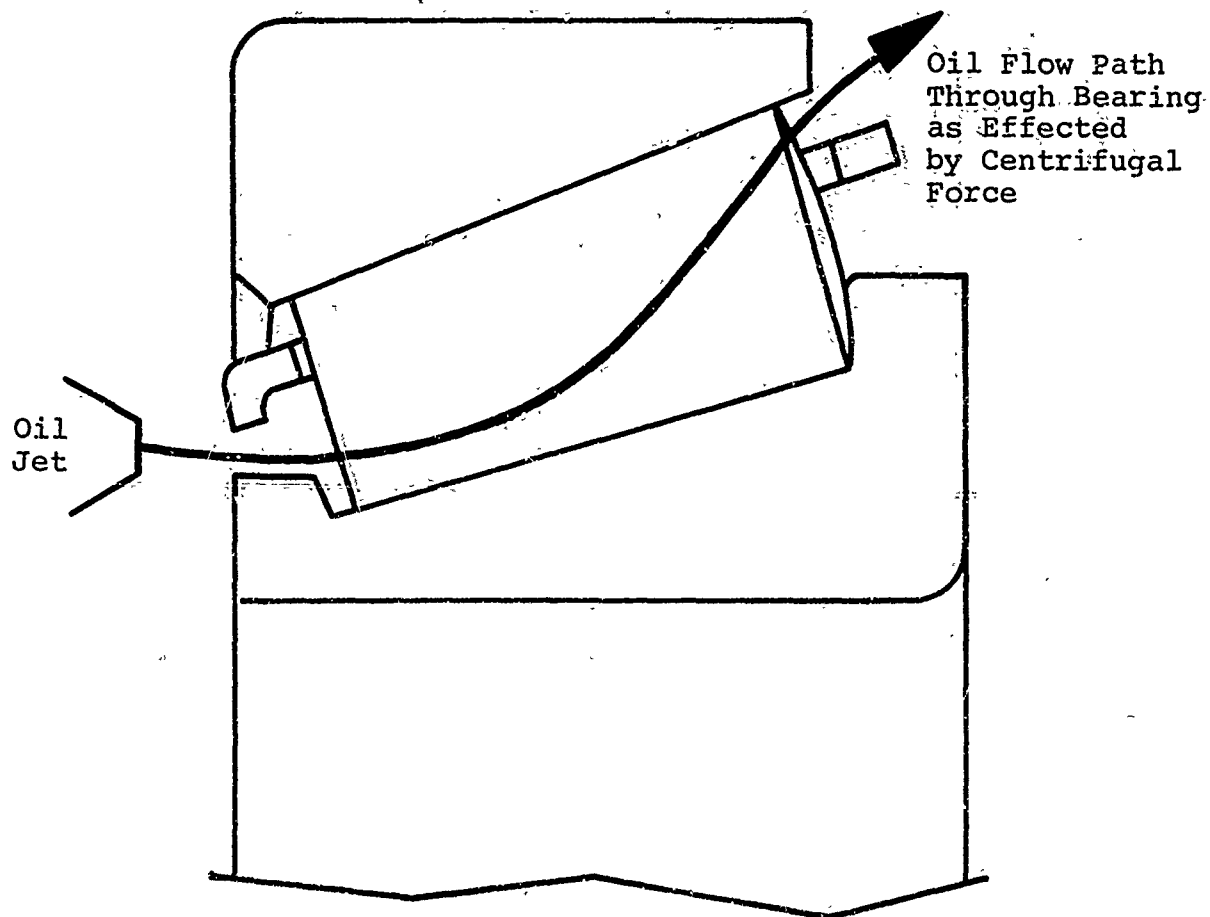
Oil Flow Path Within High-Speed Tapered Roller Bearing Lubricated at Cone Small End Only.
